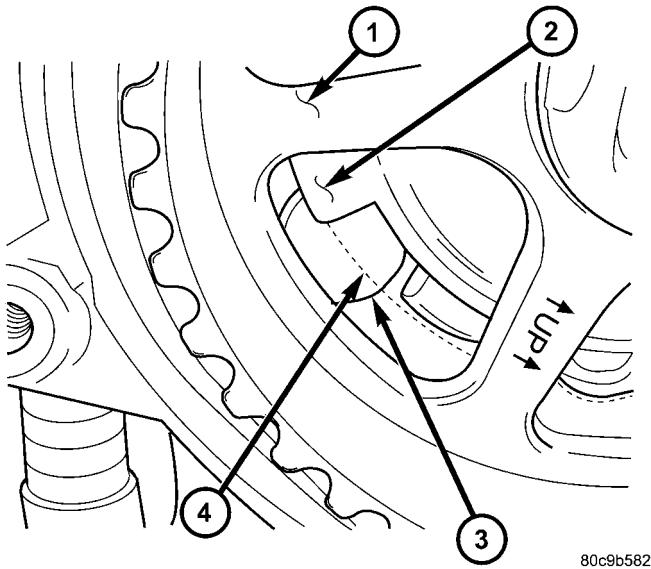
CMP FACE AT TARGET WHEEL-2.4L
